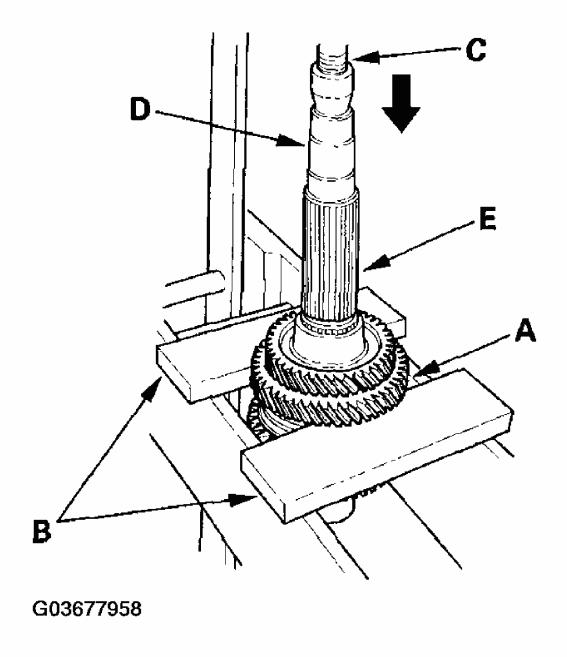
Removing Countershaft Out Of Third Gear Courtesy of AMERICAN HONDA MOTOR CO., INC.
